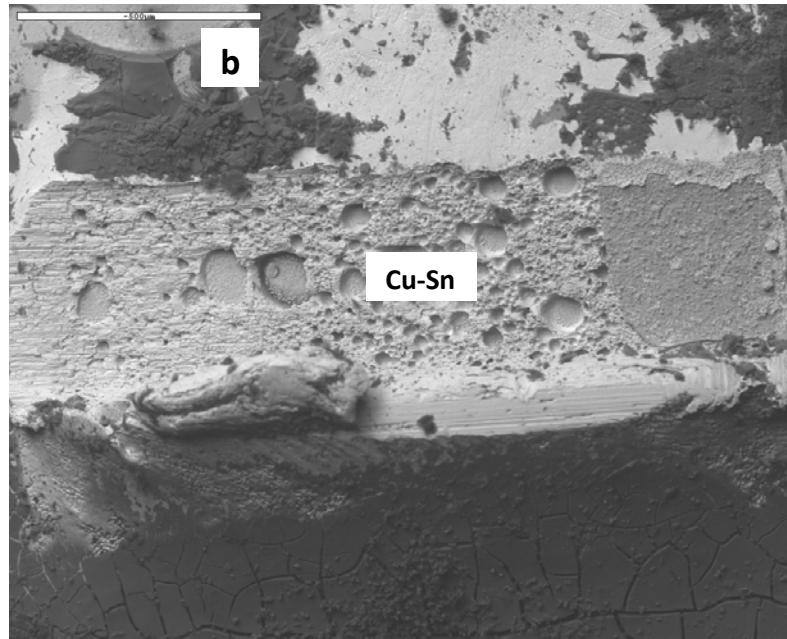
Fracture surface of the interface formed between Sn-3.8Ag-0.7Cu solder alloy and component at 200hours of isothermal ageing.
